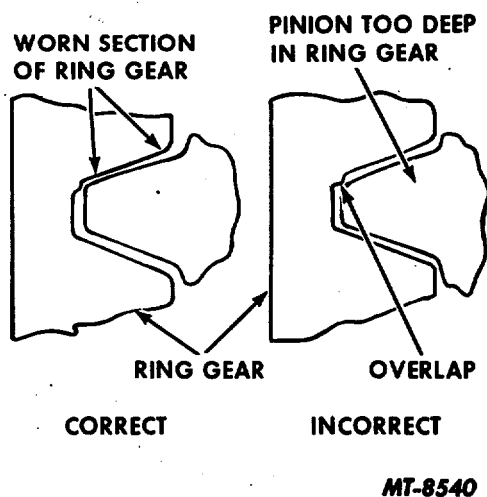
Right and Wrong Adjustment of Ring Gear and Pinion When Worn Gears Are Reinstalled
